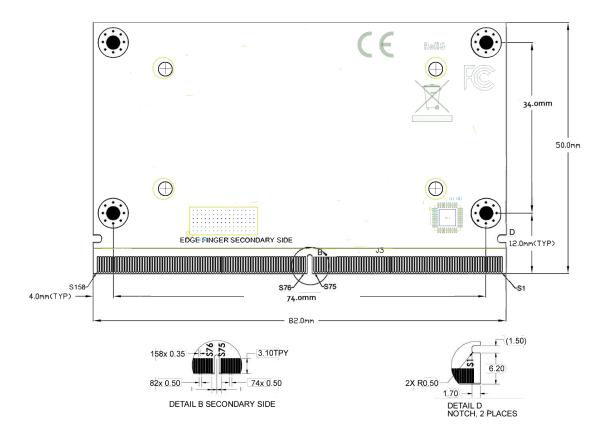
SMARC-T4378 Mechanical Drawings (Bottom View)
